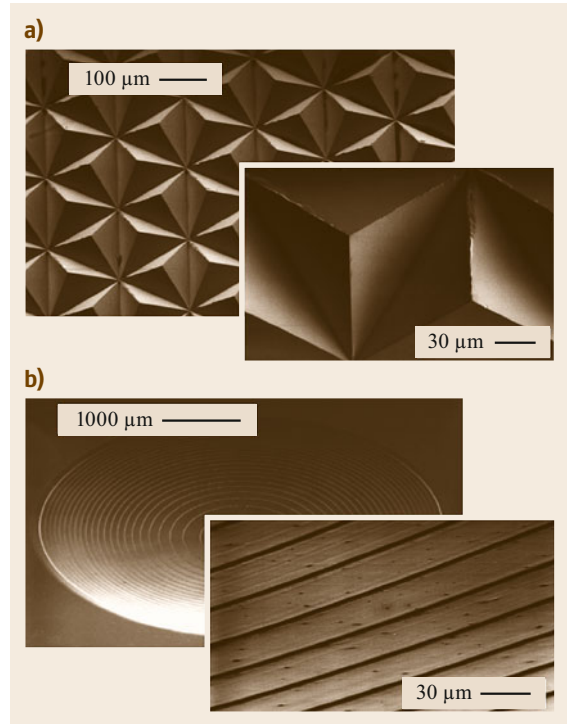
,b Features produced by diamond microcutting (source: LFM, Bremen; after [12.33]). (a) Mold for reflection foils with microprisms, material: AlMg_3 , cutting process: diamond fly cutting; (b) injection mold for Fresnel lenses, material: electroless nickel coating on powder metallurgical steel, cutting process: diamond turning
